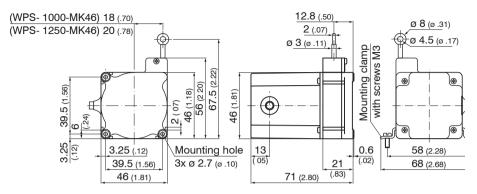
Dimensional drawing WPS- ... -MK46-CR, with potentiometer and radial cable, dimensions in mm (inches), not to scale
